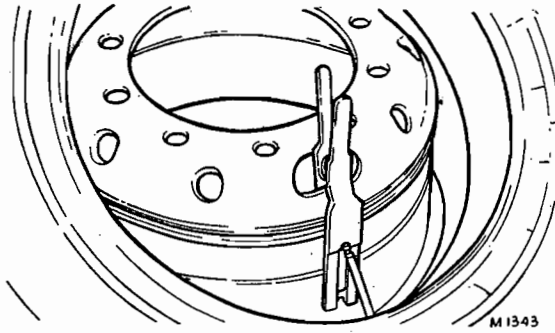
VALVE ALIGNING TOOL IN POSITION
